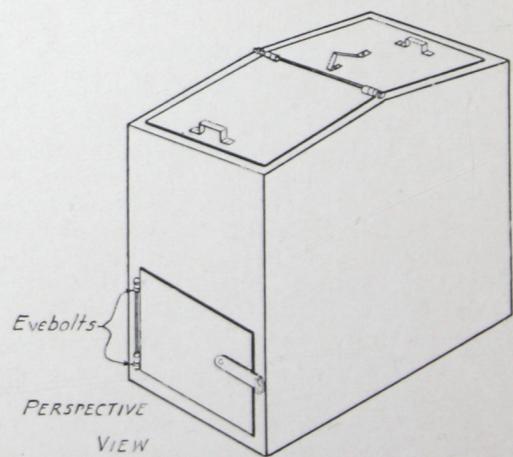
Perspective of the box shown in Fig. 1 showing the sheet steel doors and methods of attaching
